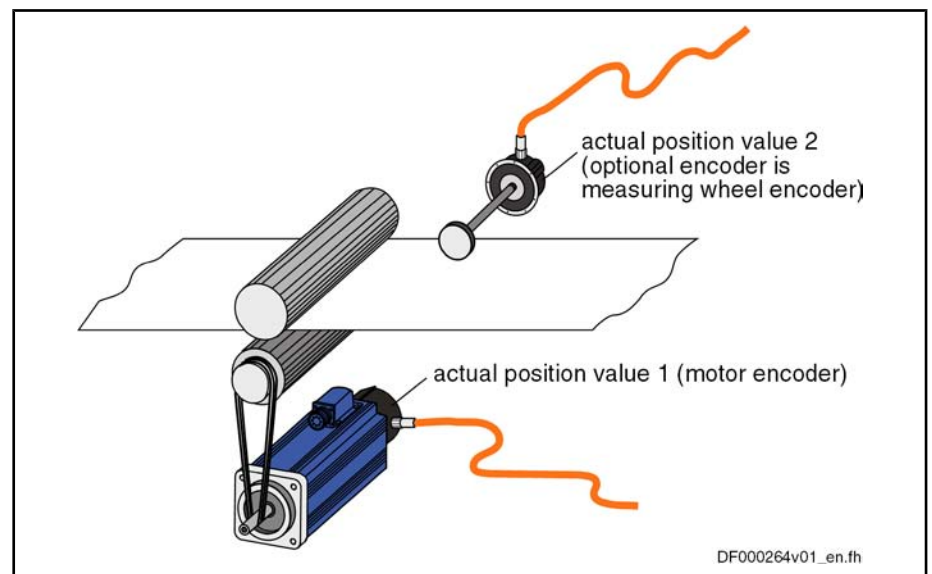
Typical arrangement of drive for material infeed with measuring wheel encoder
